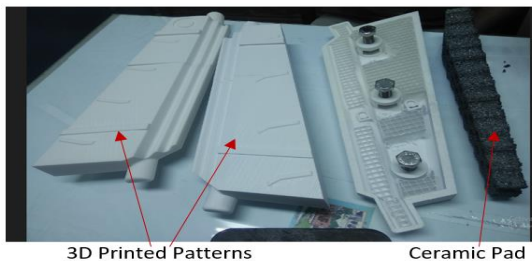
Ceramic Pad and 3D Printed Plastic Pattern for Mould Making
